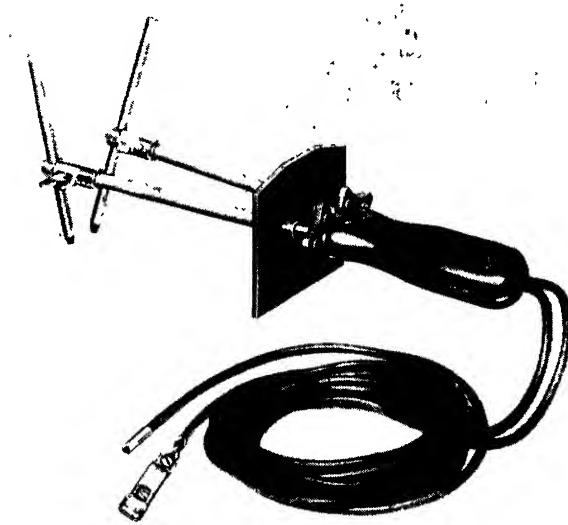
The carbon-arc torch is used for braze welding, preheating, and other general heating work about the shop. (James F. Lincoln Arc Welding Foundation)
